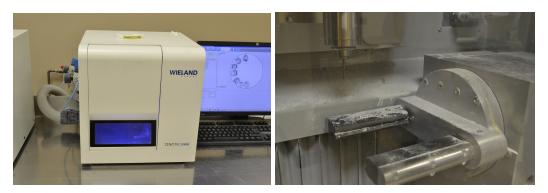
Five-axis milling machine used at New Image Dental Lab
